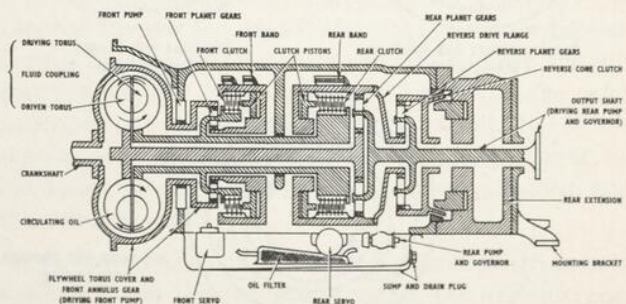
A—DIAGRAM OF GEARBOX LAYOUT.
